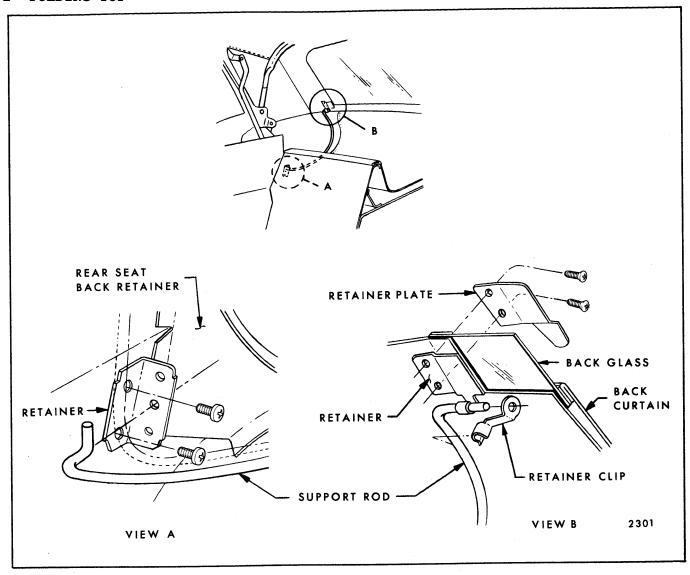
"B & C" Body Back Glass Support Rod Attachments
